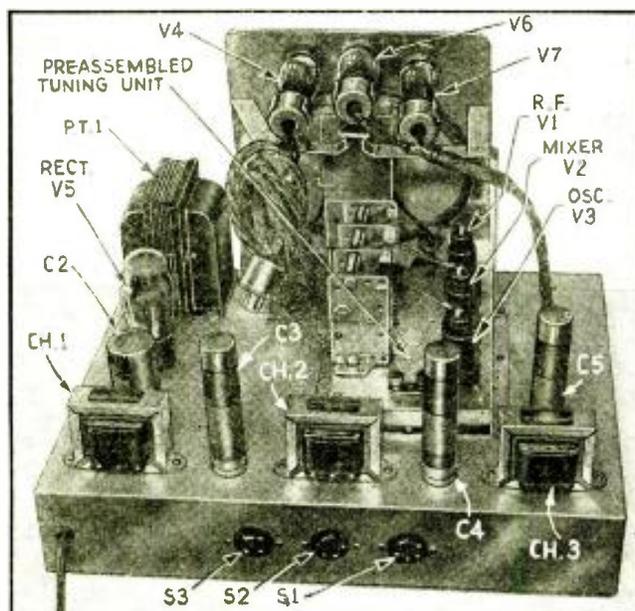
Fig. C. Rear view of Chassis No. 1 showing placement of components.
